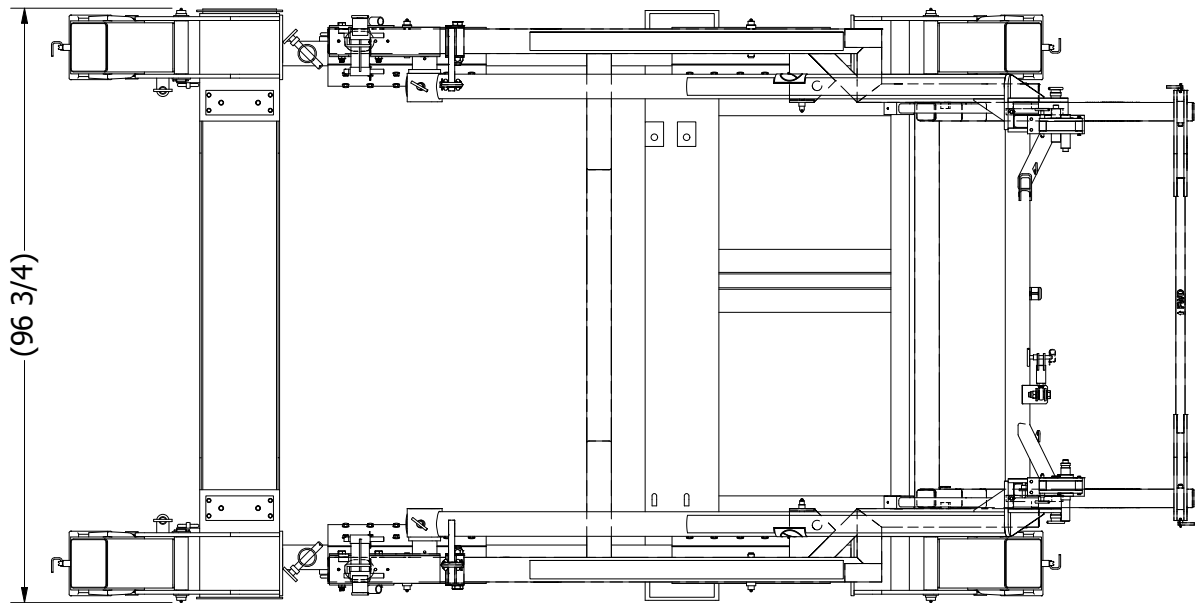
Dimensions of AM-1928-155 Transport Base Assembly and AM-1928-156-80A-B Cradle Assembly with Bootstrap Kit for CF6-80A Engine
